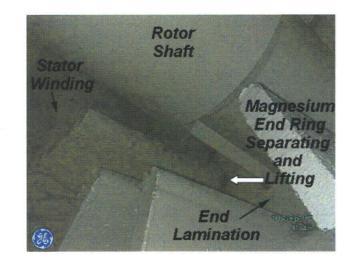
Onset of magnesium end ring separating from rotor end lamination. The cooling fin has deflected outwards towards the stator winding but has not yet come in contact with the stator winding. This motor would not meet borescope inspection acceptance criteria.
